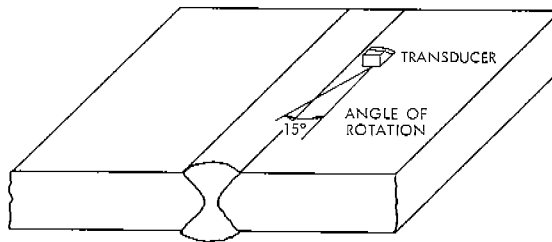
SUPPLEMENTARY TECHNIQUE FOR INSPECTING BUTT WELDS WHEN THE WELD BEAD IS NOT GROUND FLUSH
